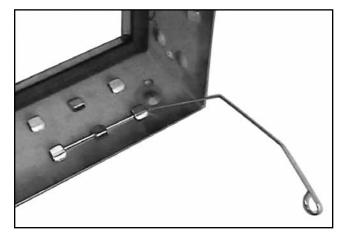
Correctly installed latch; AAF 315-004-003 shown as an example.
